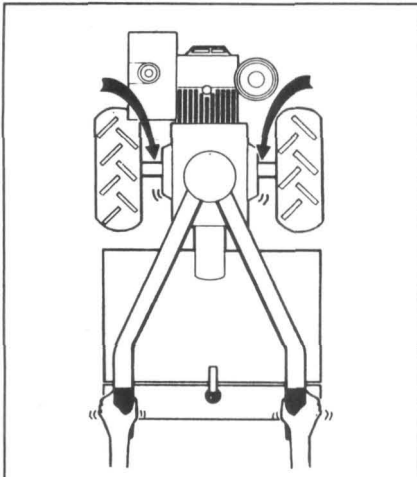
Pre-Disassembly Inspection of the Wheel Shaft.
